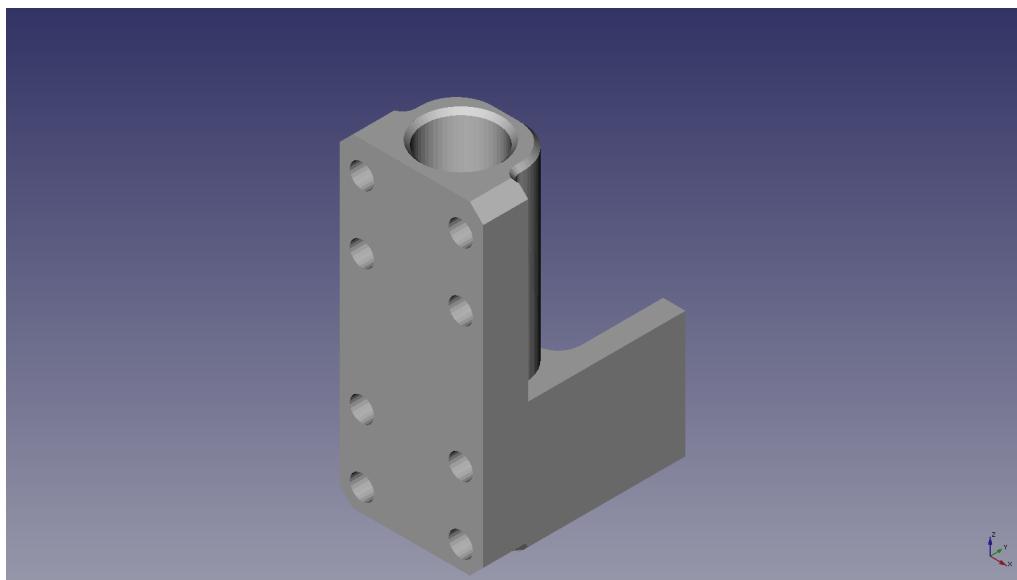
Begonia 3D Printed Extruder Mt Top Double Bearing Holder Render
